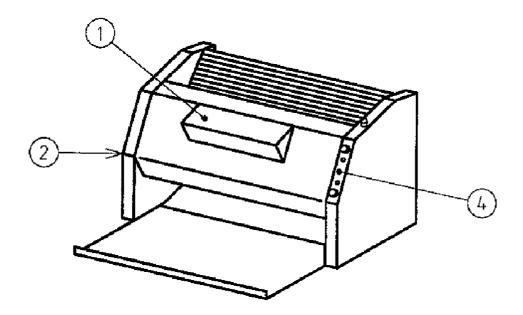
(moulder type/1), 3b (moulder type/2) and 3c (moulder type-3) show the danger zones.
